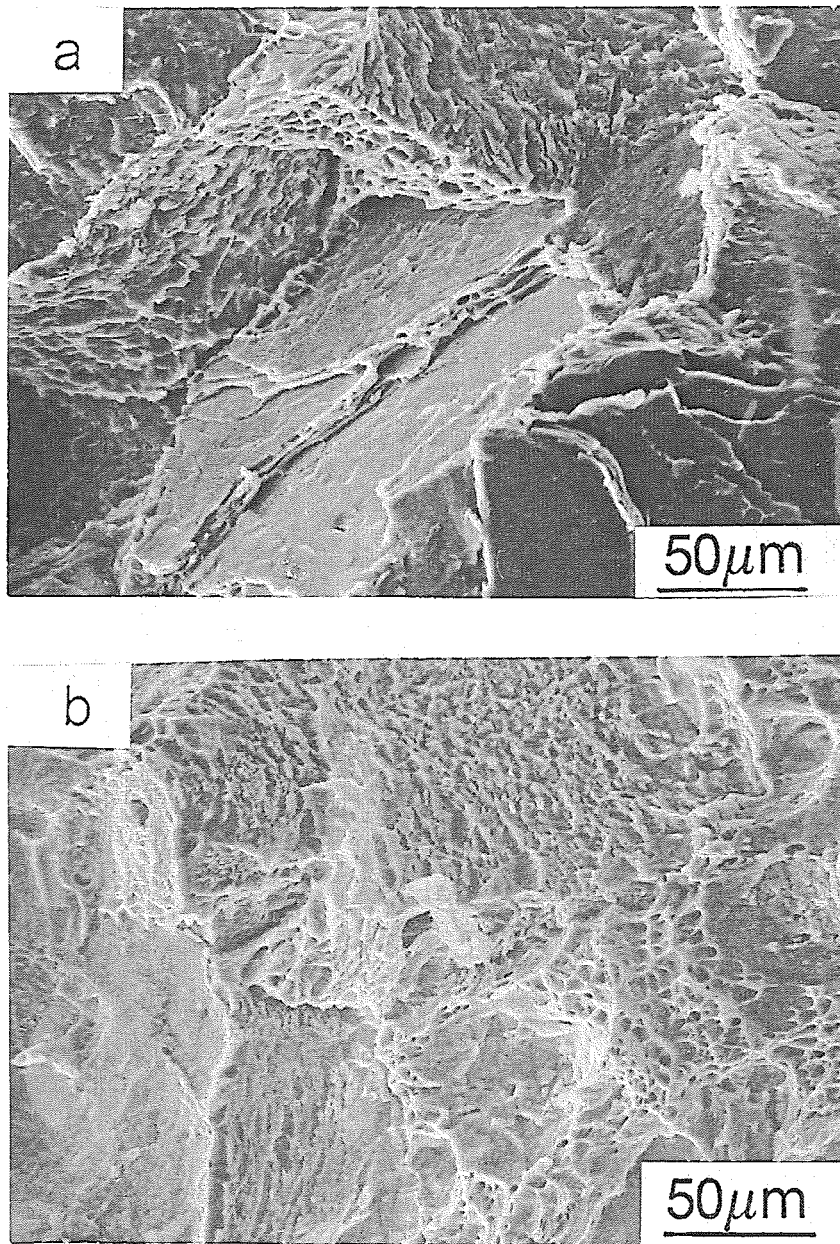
Fracture facets of specimen B2 impact tested at RT: carburized zone (a); non-carburized core (b)
